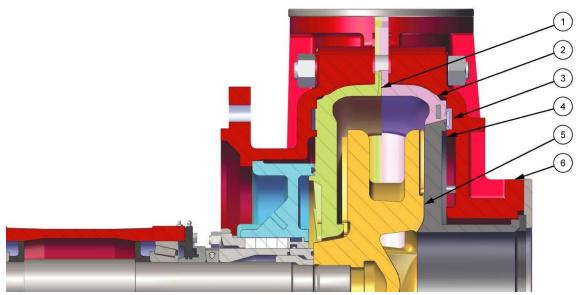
Three Part Separate Rubber. Fitting Frame Plate Liner, Cover Plate Liner, Throatbush, Volute Liner Seal, Impeller and Cover Plate.
